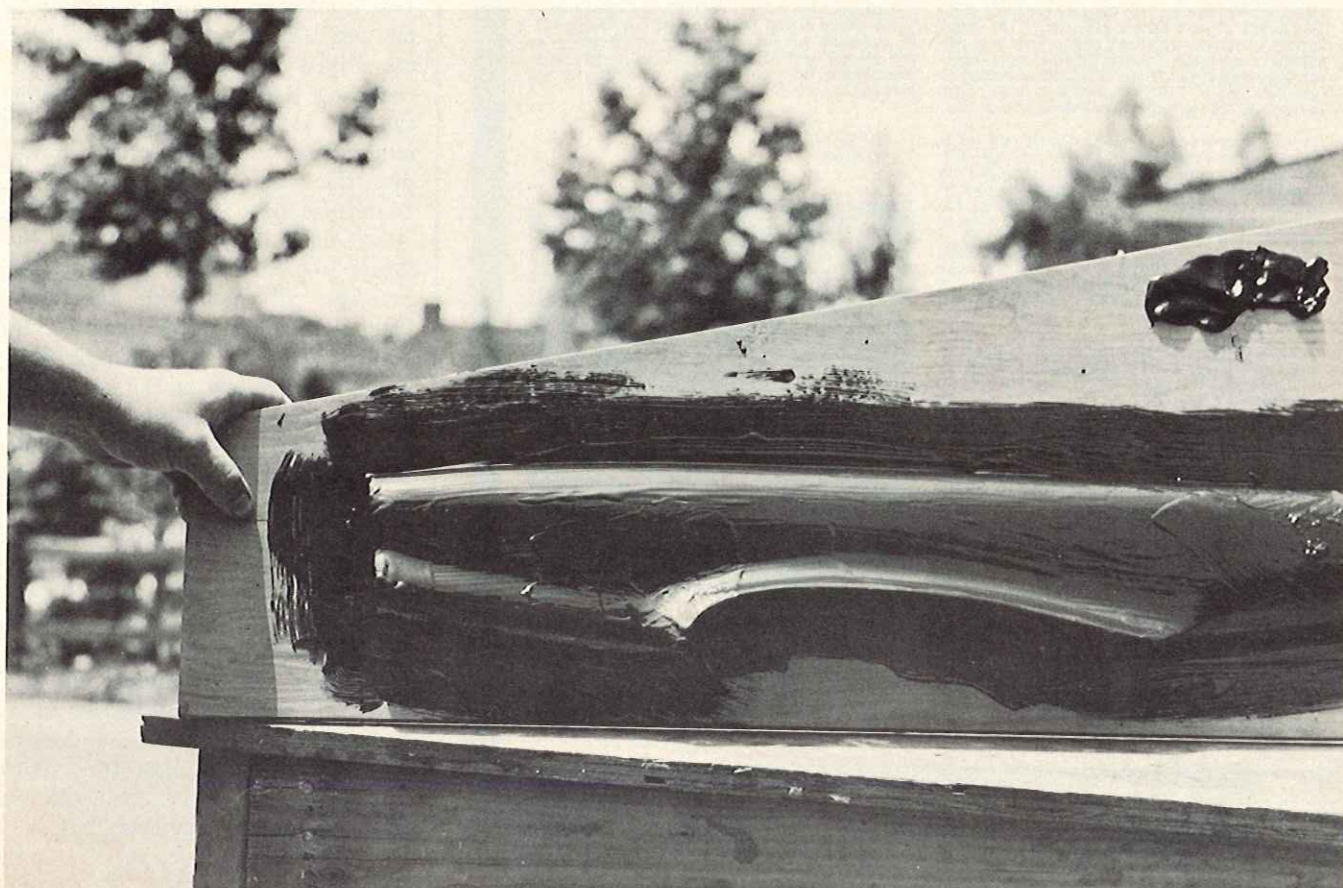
(Above) The completed and waxed male mold half mounted on base board, ready for first Gel coat.
